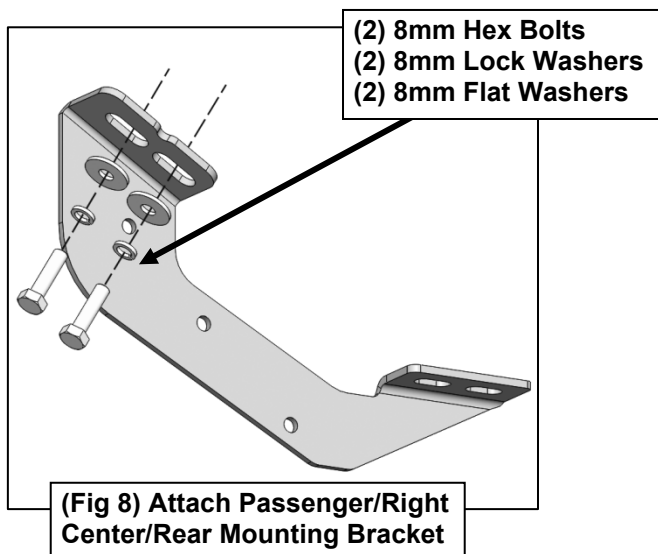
Attach Passenger/Right Center/Rear Mounting Bracket
